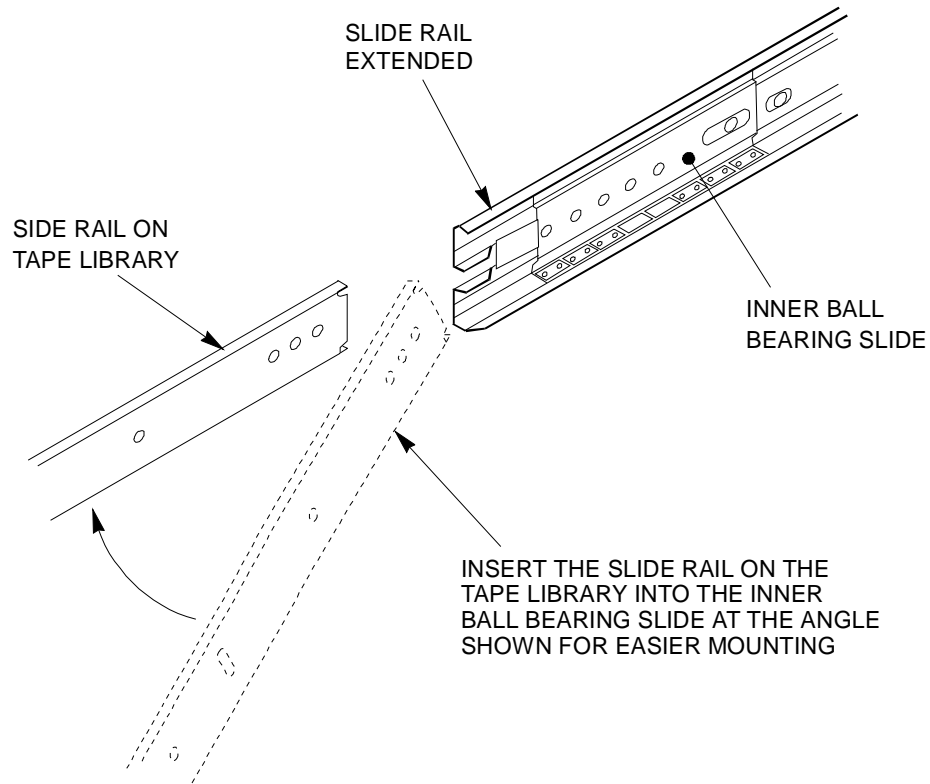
Mounting the Q2.15 onto the Slide Assembly
